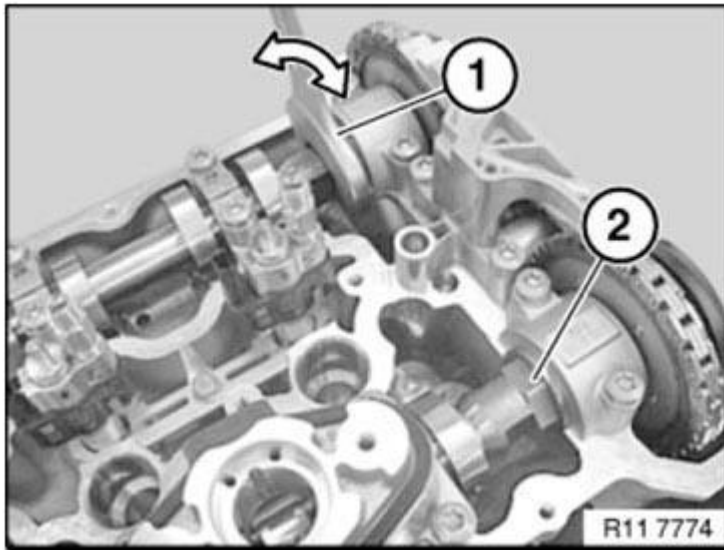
Rotating Exhaust Camshaft At Dihedron With Fork Wrench Into Suitable Position
